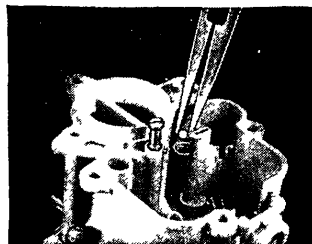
Install pump discharge check ball and plug. Discharge ball is large one. Be sure to put check balls in correct passages
